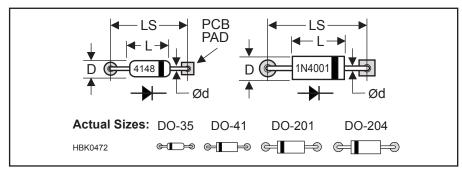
Axial-leaded diode packages and pad dimensions.
